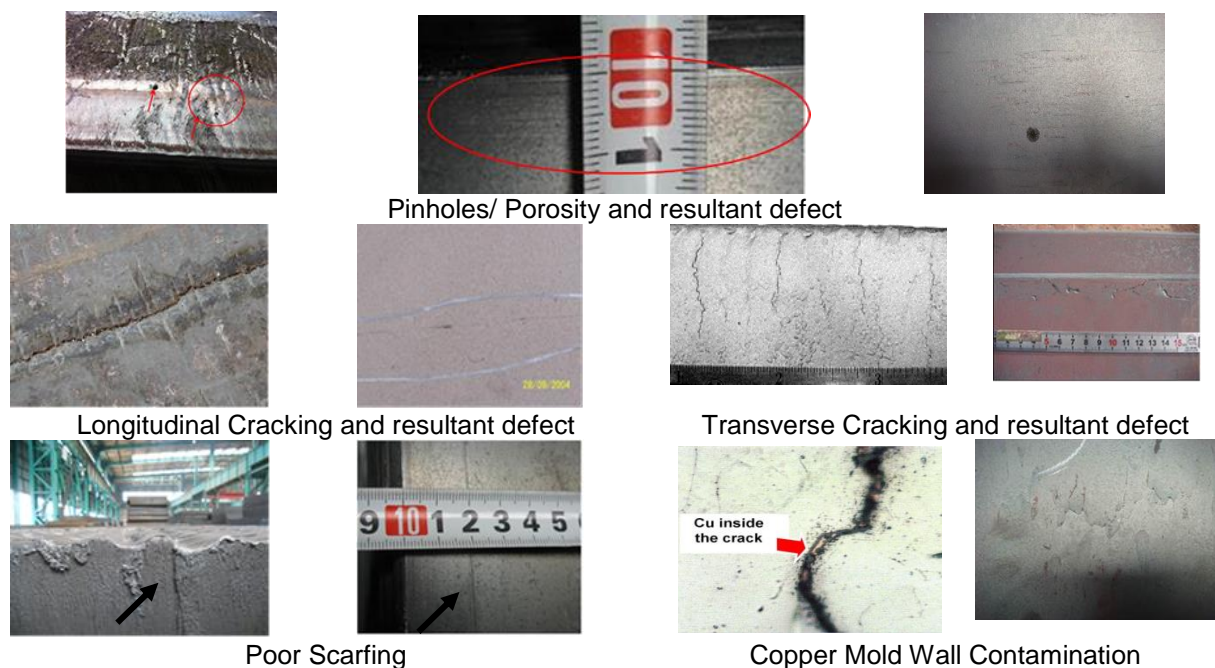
Examples of typical slab external quality issues and corresponding hot strip surface defects
